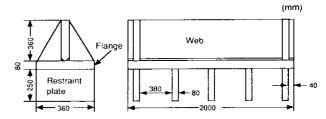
Restraint cracking test method for fillet welded joint with 80-mm-thick web
